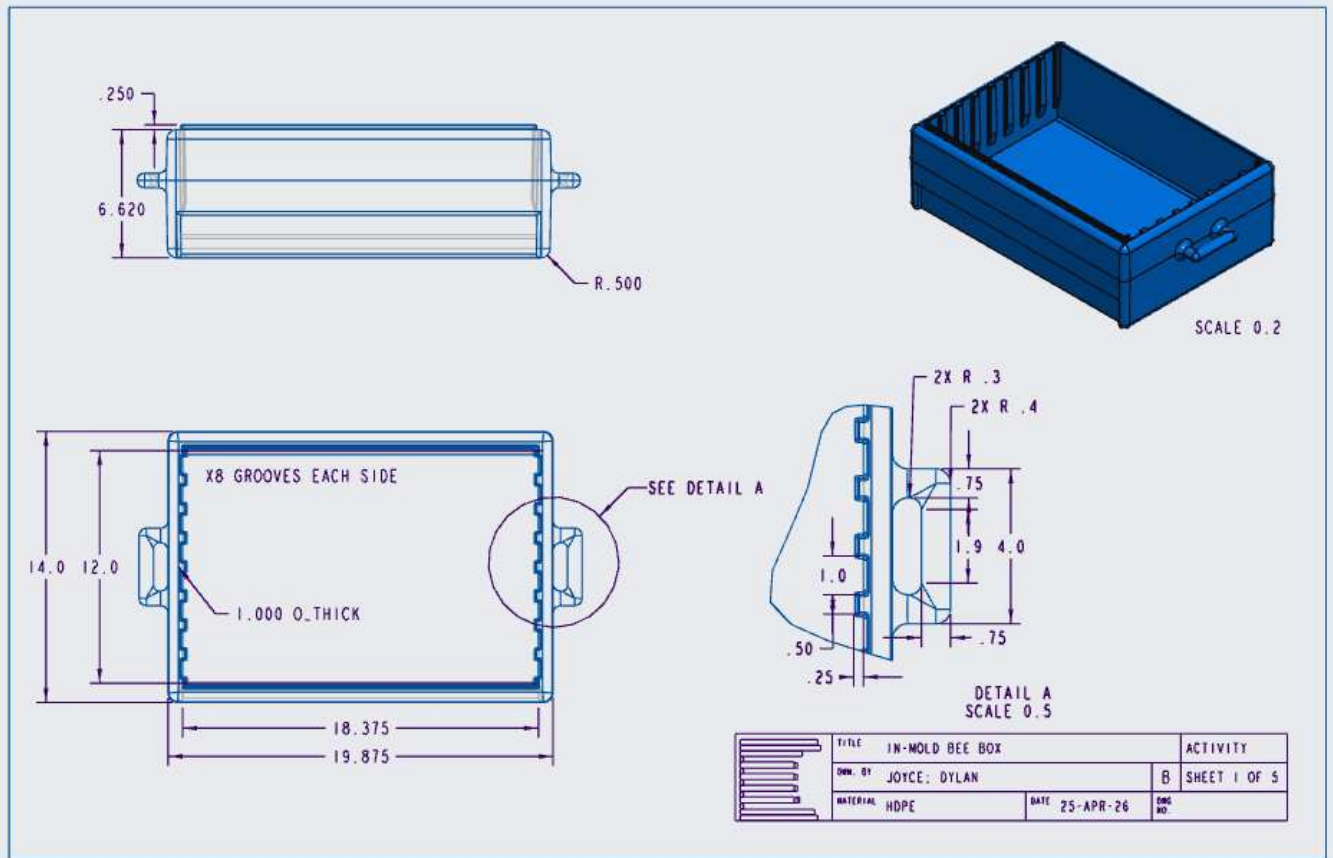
Dimensioned Drawing of In-Mold Bee Box
